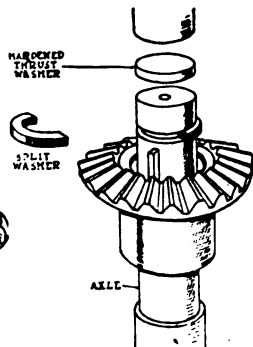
Don't attempt to remove the side bevel gear from the axle drive shaft until the split washers have been removed in the manner shown.
